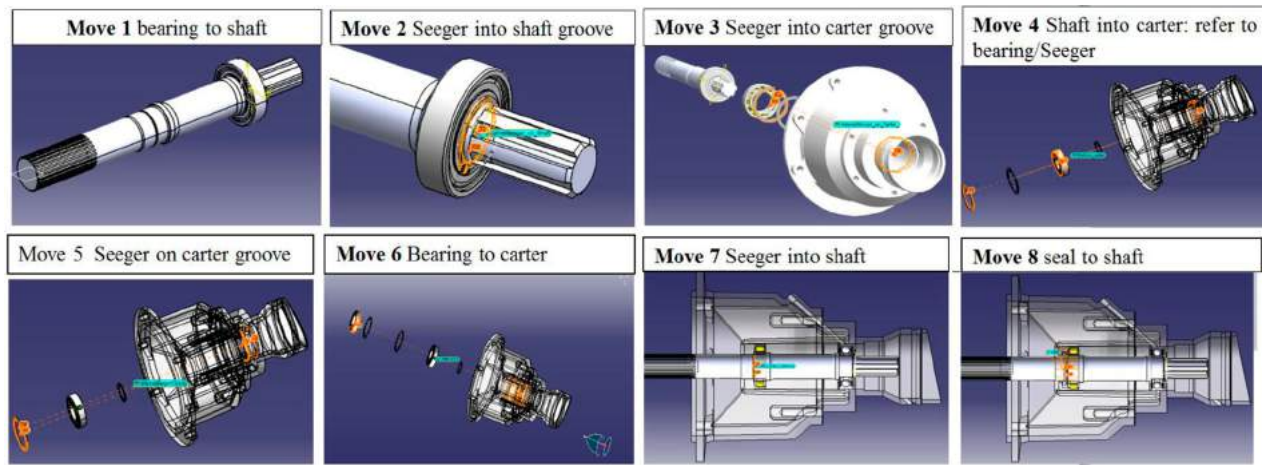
Assembly sequence: move 1 to move 8 to complete the assembly asset.
